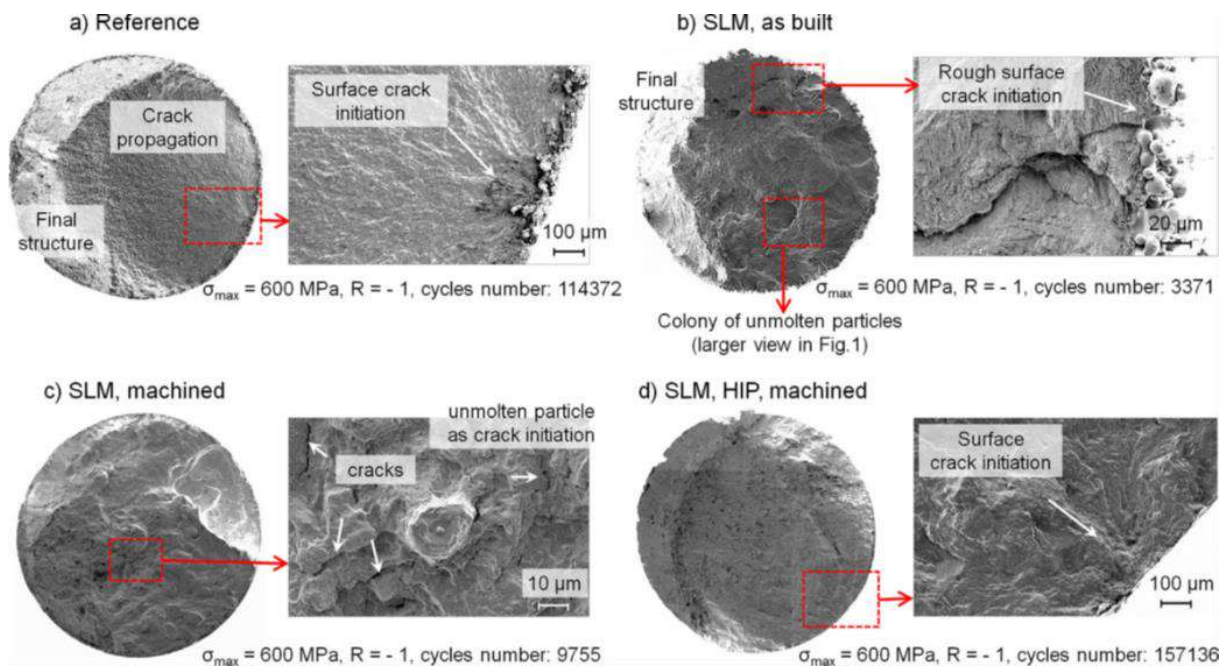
Fracture surface of specimens after fatigue tests [14]
